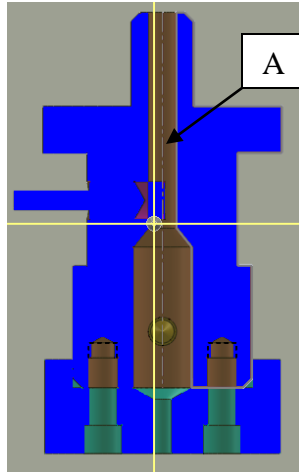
Cross sectional view of electrode holder showing internal bore.
